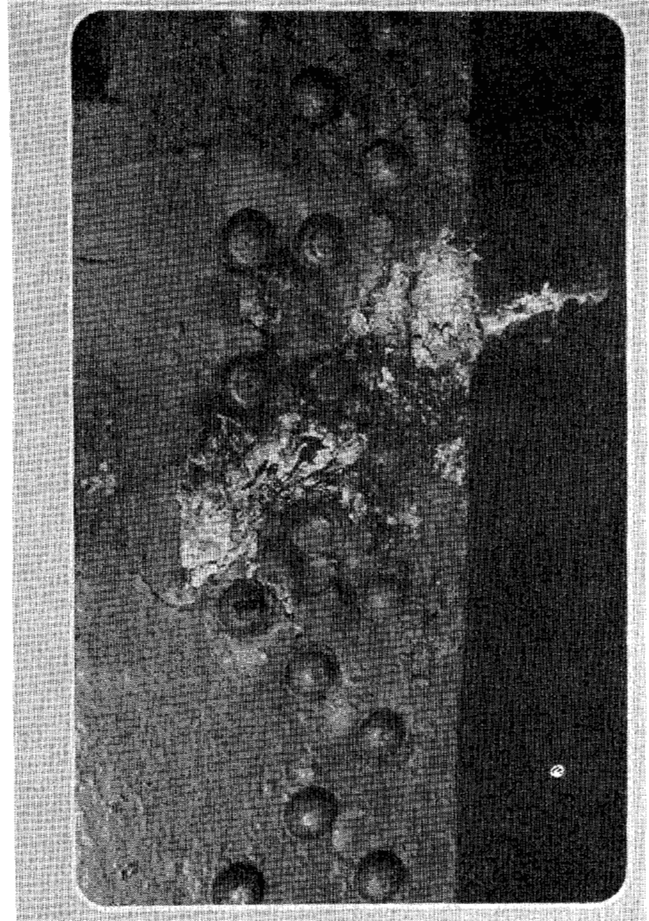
Corrosion of Aluminum at a riveted joint
